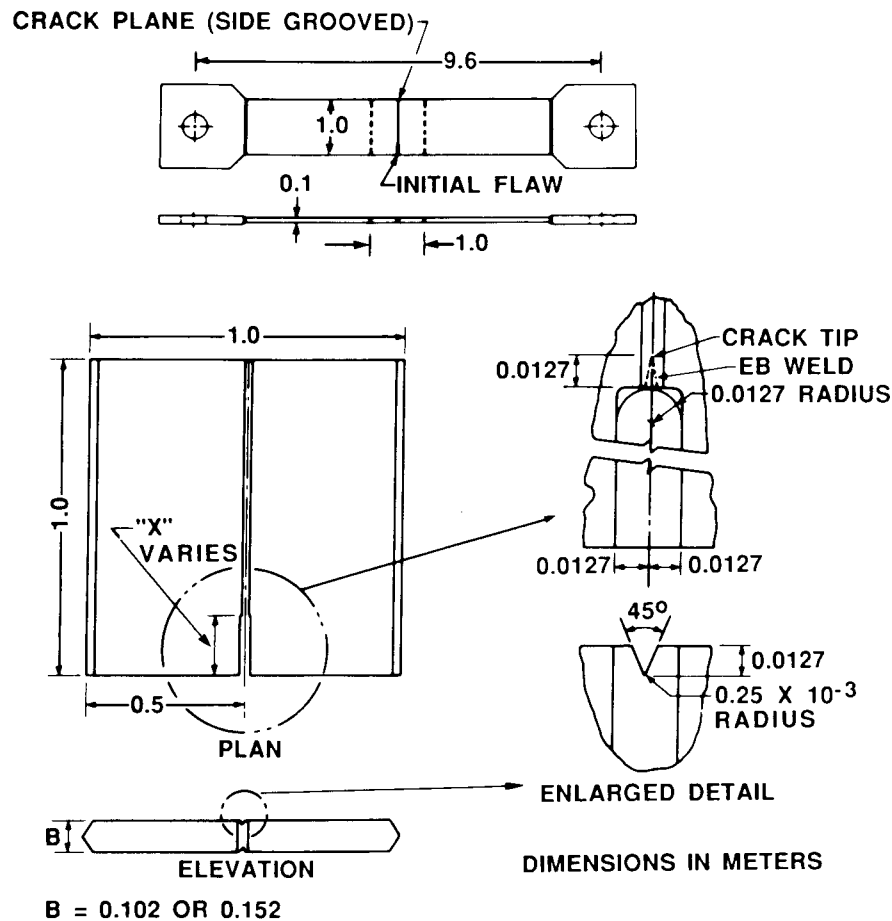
Schematic of HSST wide-plate, crack-arrest specimen.
